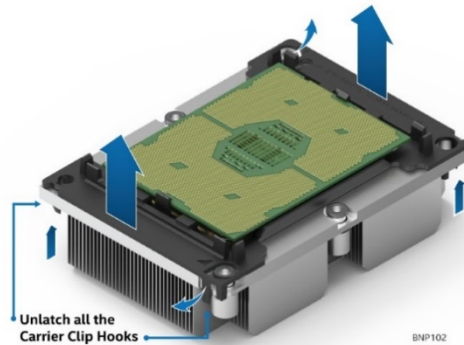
Releasing the Processor Carrier Clip from the Heat Sink
